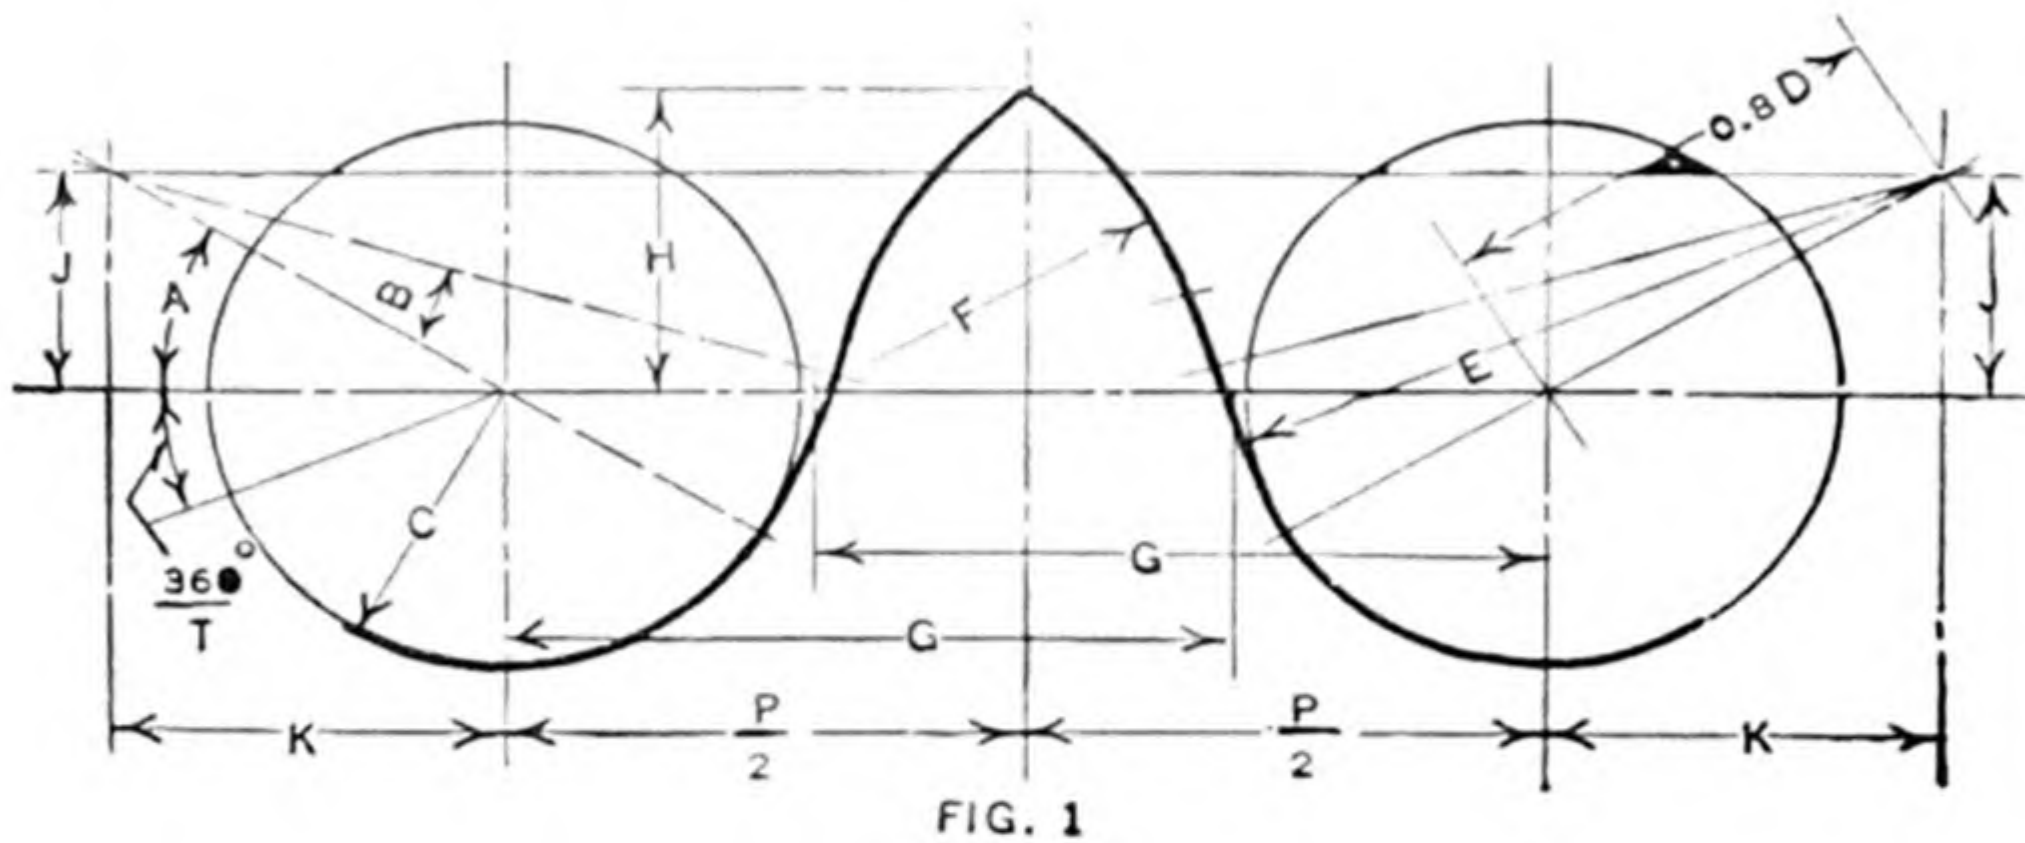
Roller-chain Sprocket Tooth-form; Fig. 2. Alternate Layout of Sprocket Tooth
